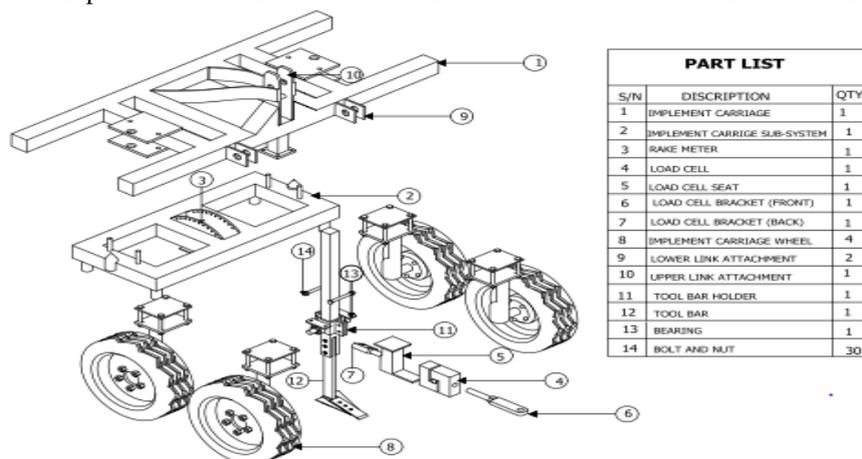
Exploded view of the tool carrier with winged subsoiler and load cell attached
